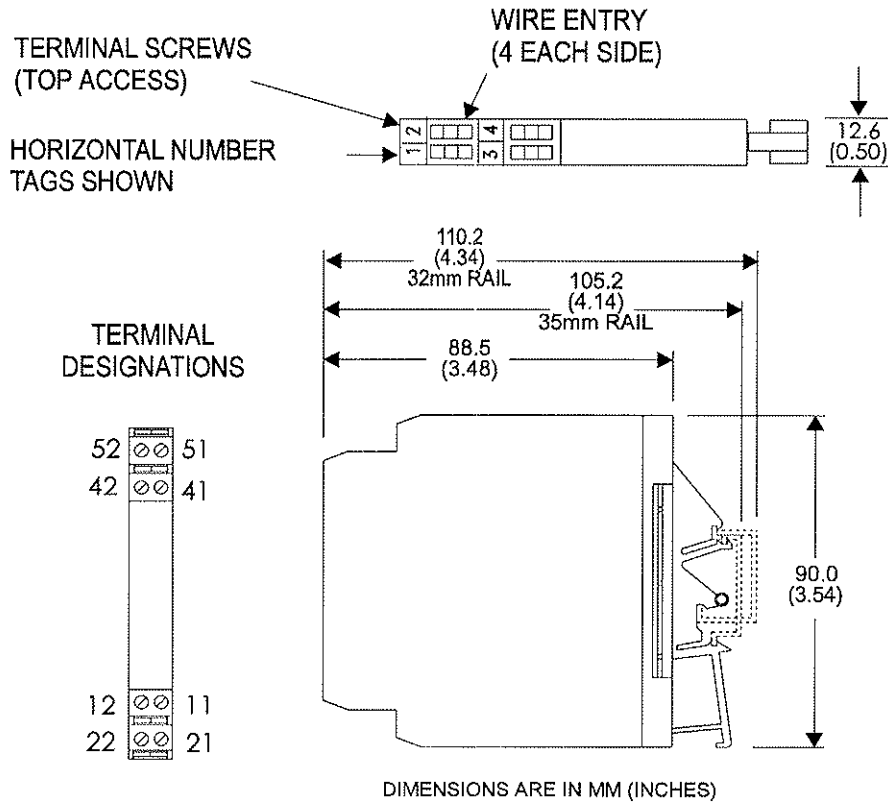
Mechanical dimensions for DRG-SC-DC-U.
